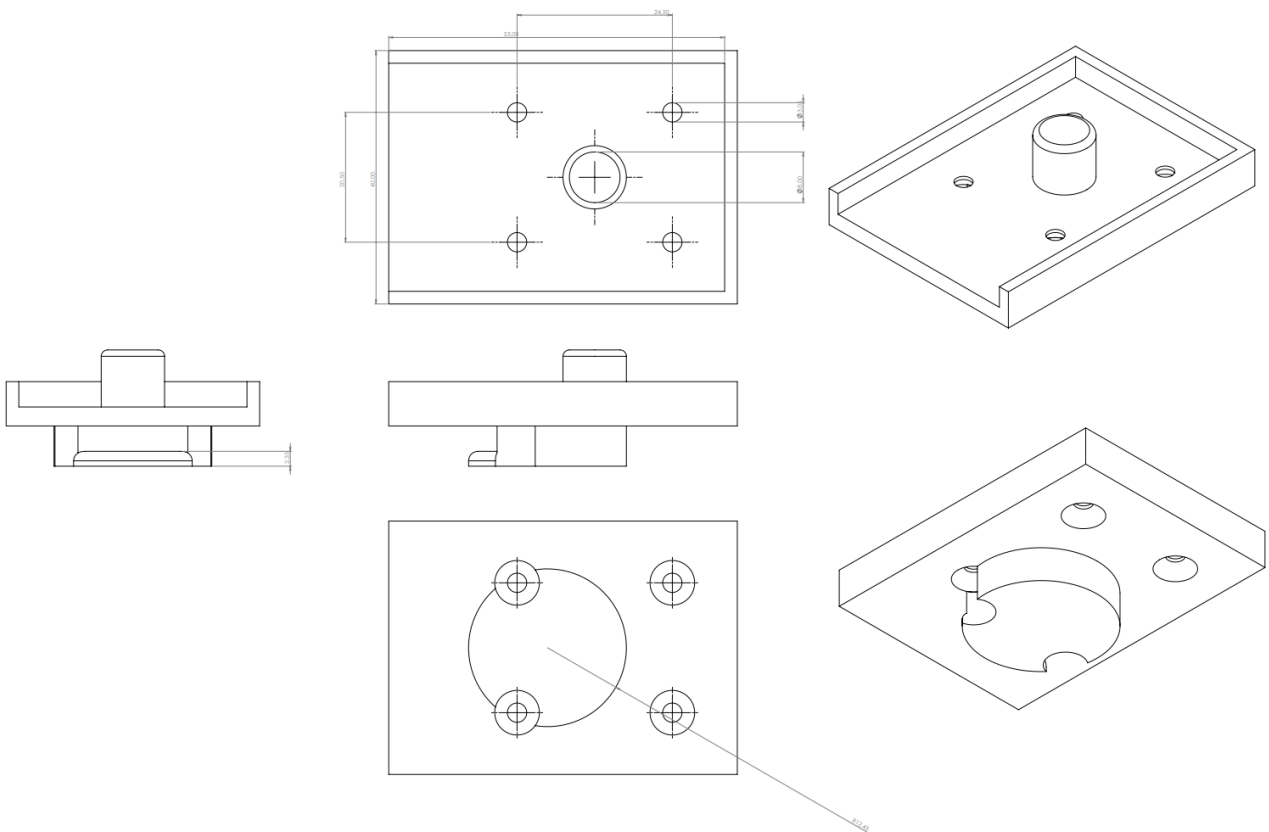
SW drawings of the 3D printed part that is designed to attach the threaded rod to the translation stage
